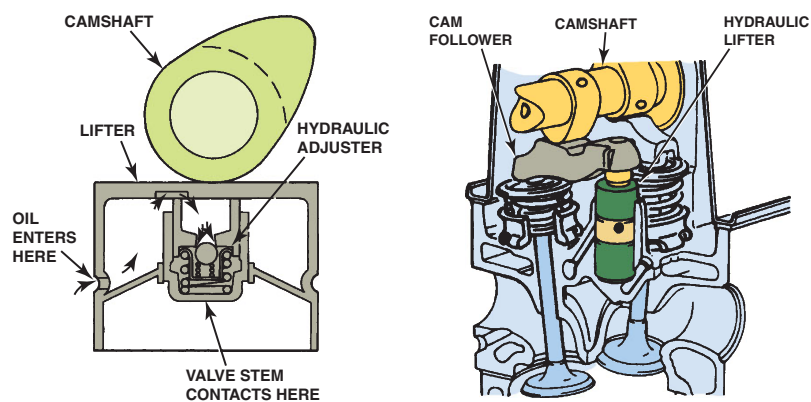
Schematic example of a bucket tappet valve actuation mechanism (left) and a finger follower valve actuation mechanism (right) [6].
